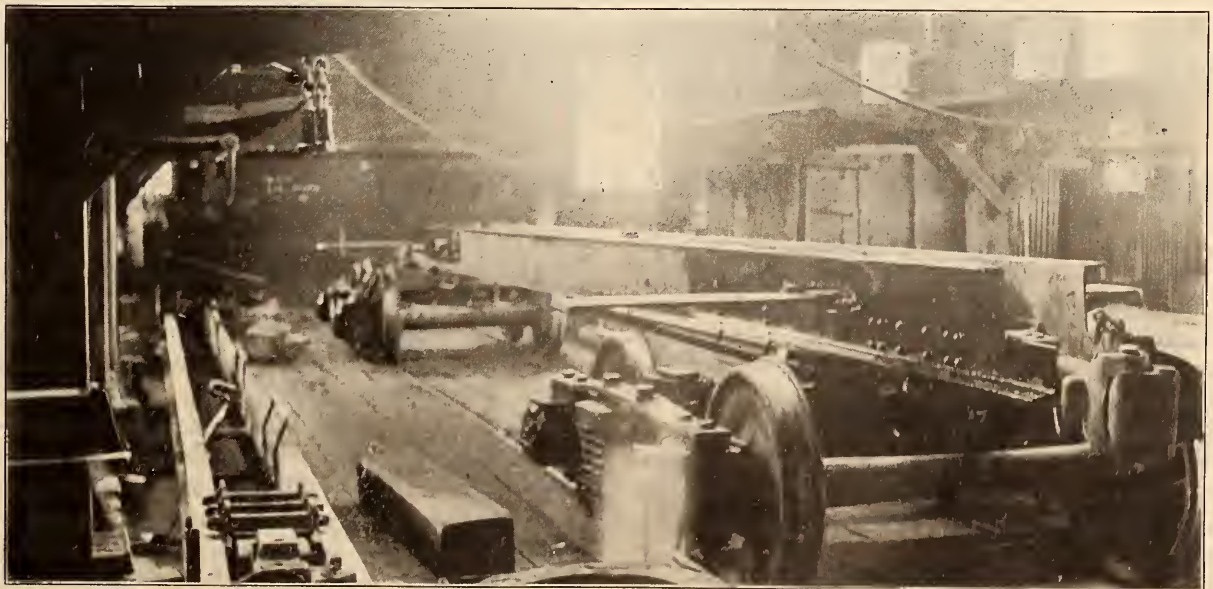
C., M. & ST. P. RY., COAL CAR SHOWING STEEL CHANNEL CENTER SILLS AND BODY BOLSTER.
